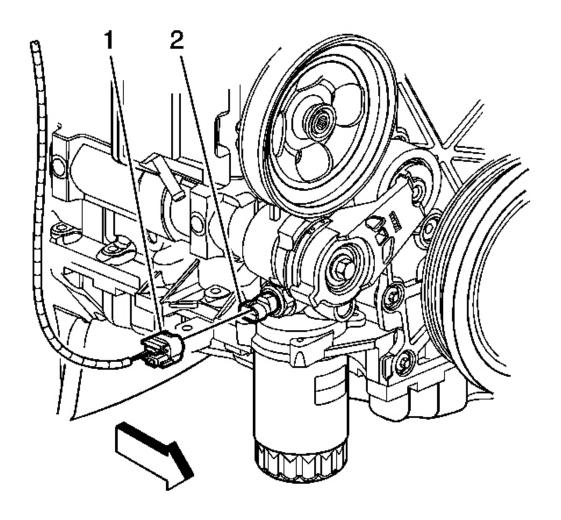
View Of Oil Pressure Switch Engine Wiring Harness Electrical Connector
